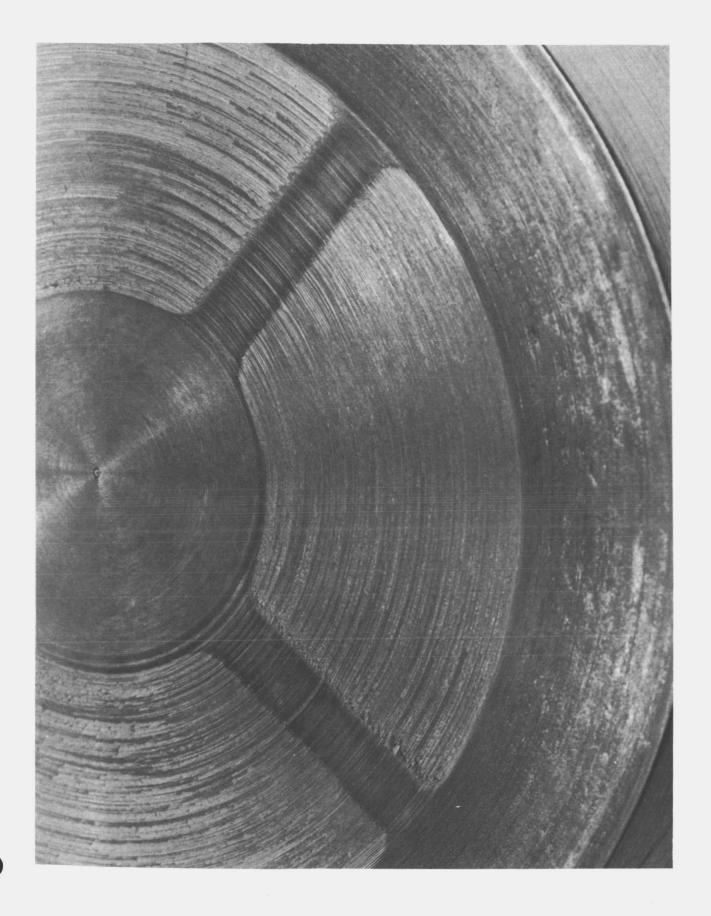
Final Simulated Impeller Sample Showing Inlet Area After Bonding and Tooling Removal
